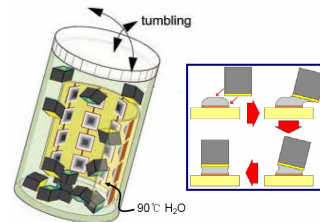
Surface tension directed self-assembly. The solder coated areas on the substrate wet and bind to the metal contacts on the device segments during the self-assembly process.
